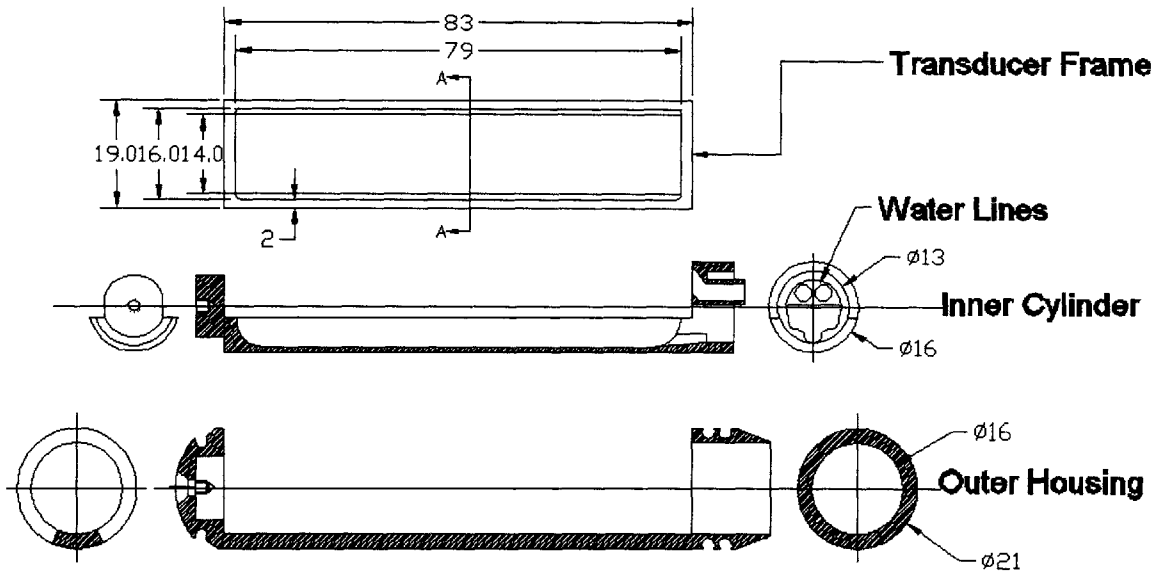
Close-up of the front portion of the intracavitary applicator. The Transducer frame holds the linear phased array. The frame is attached to the inner cylinder. The inner cylinder rotates inside the outer housing. The outer housing has O-ring slots for anchoring the latex condom used in the ultrasound coupling system.
